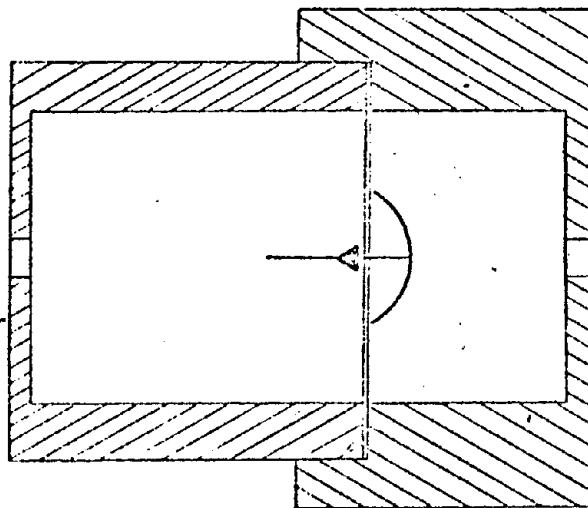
Valve Holder - Assembled Unit with Valve in Place
